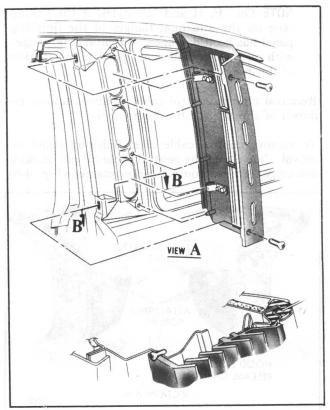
Louver Assembly - "X-17, and Standard X-27"
